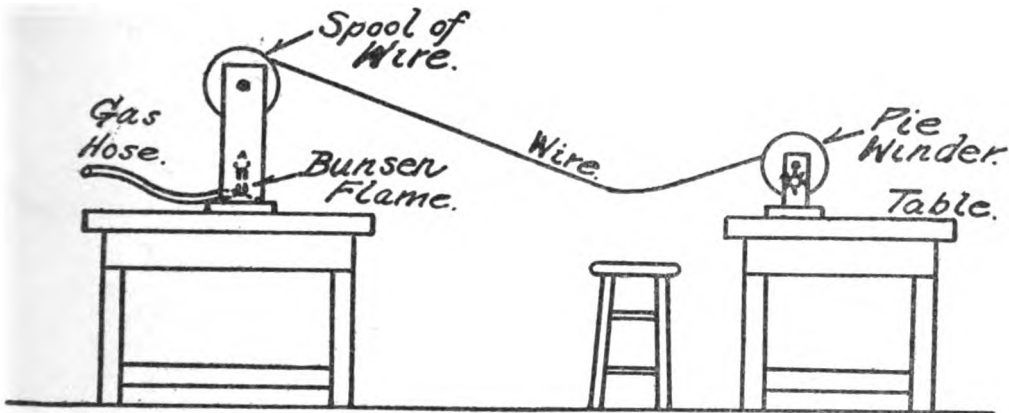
METHOD OF WINDING SECONDARY SECTIONS IN ORDER TO INSURE THE HIGHEST POSSIBLE INSULATION
